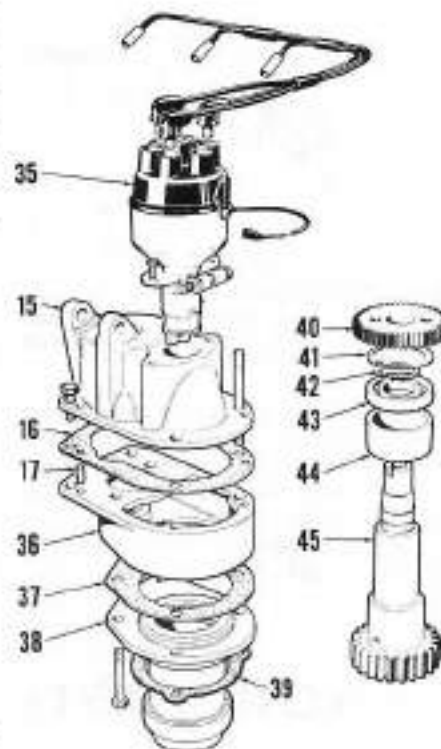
Exploded view of distributor drive unit. Bearing support (20—Fig. 75) mounts on lower housing (36).
